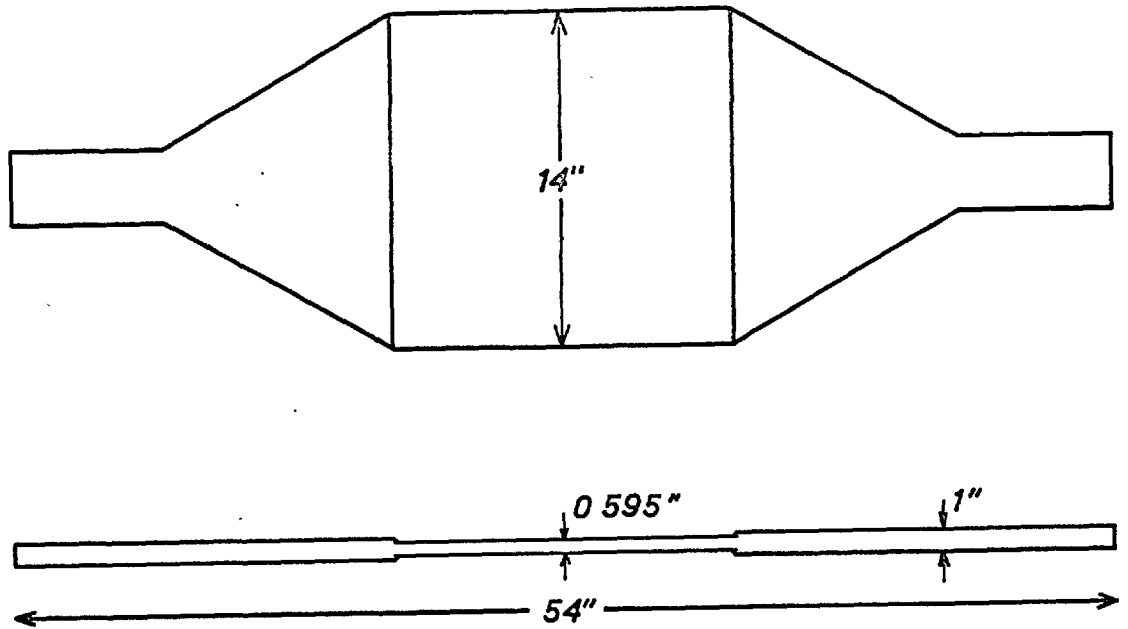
Dimensions of specimens used in the 100 ton Avery machine.
